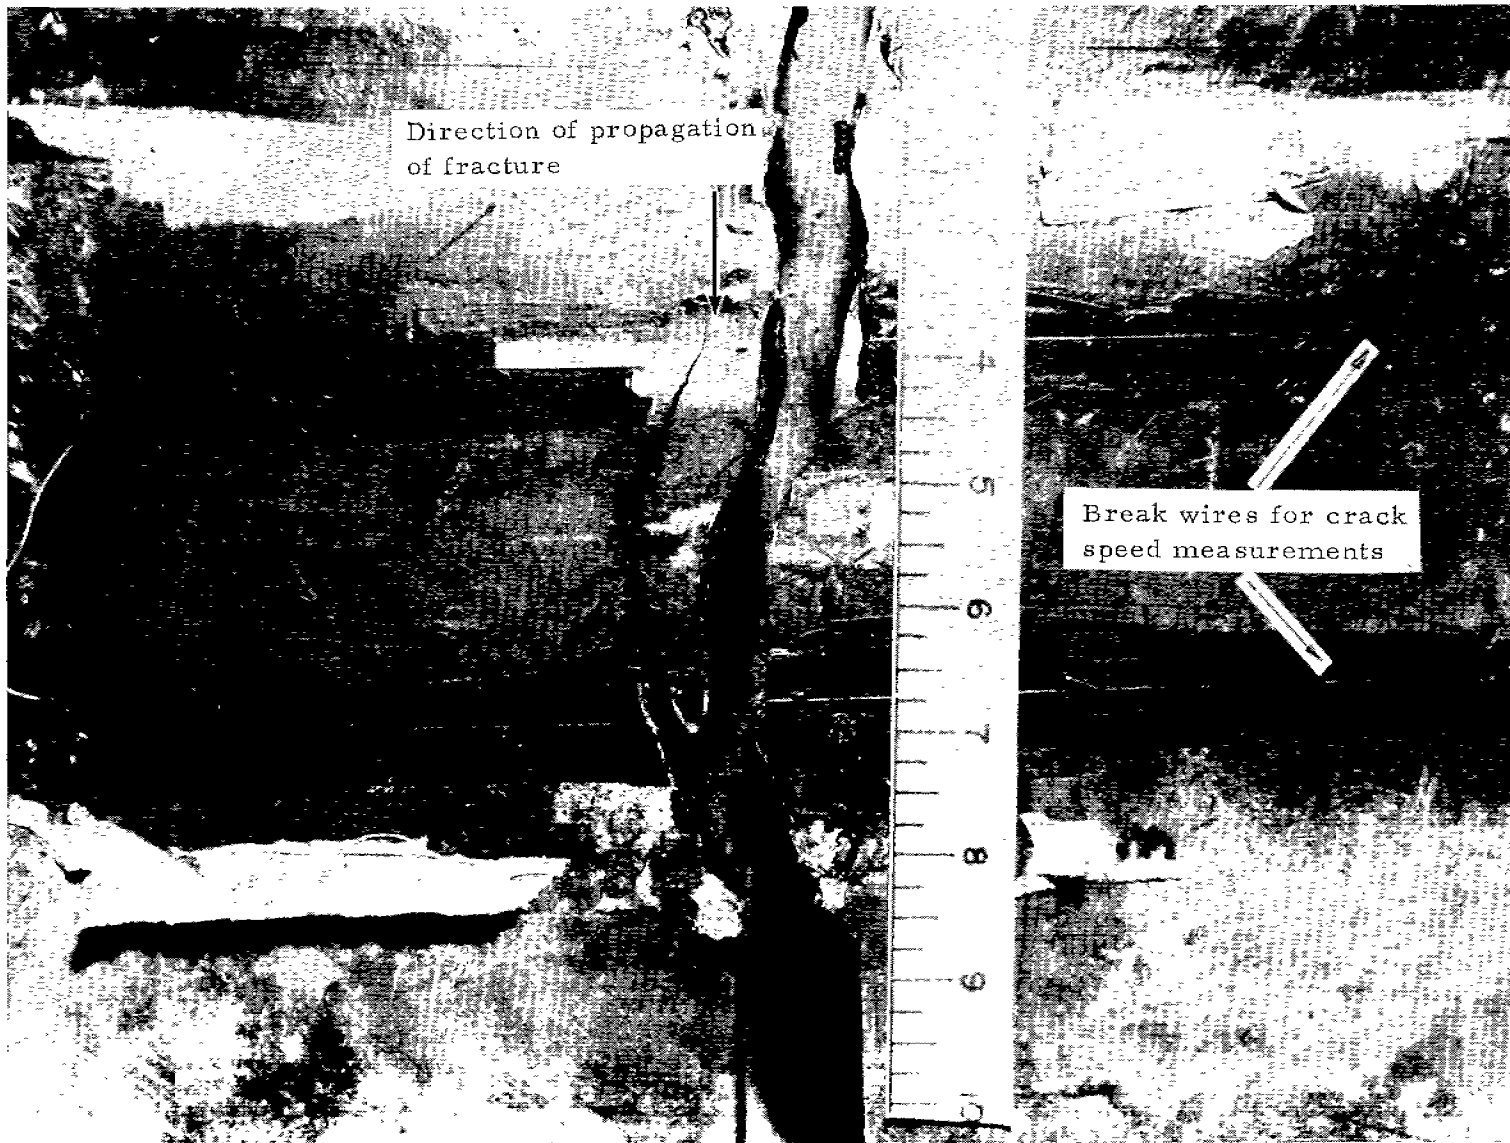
General View Of The Fracture - Test B8; Specimen Configuration: Initiation By Means of Brittle Bead At The End Of A 6" Edge Slot, Other Side Of Specimen; Test Temperature: -35°F ; Fracture Stress: 41,800 Psi On The Gross Section; 44,000 Psi Avg. On The Net.
